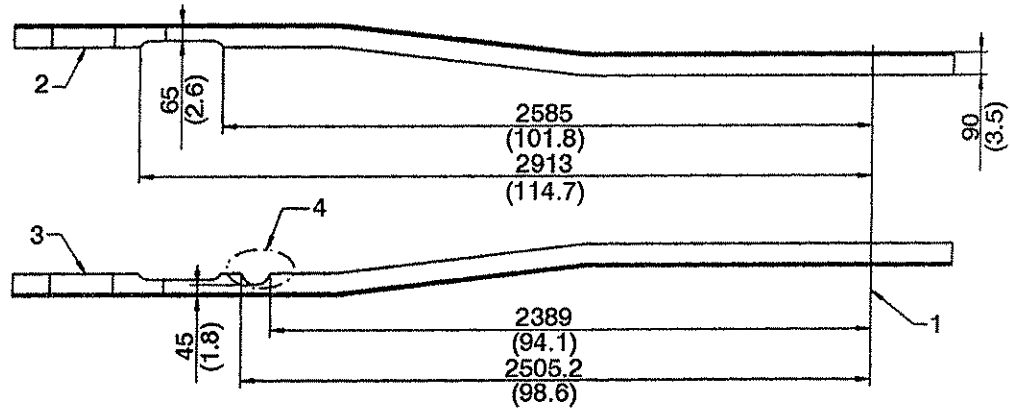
Frame Rail Cutouts, 90 mm (3.54 in.) Flange, Lower
